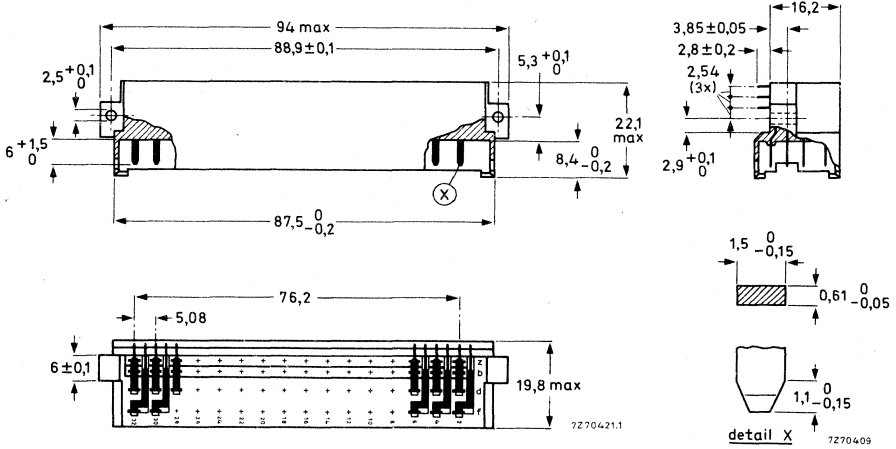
Male part with 90° angled dip-solder pins. The pitch between the pins of rows z and f is 2,54 mm instead of 5,08 mm.
